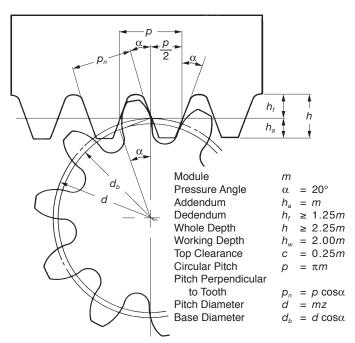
The Tooth Profile and Dimension of Standard Rack
